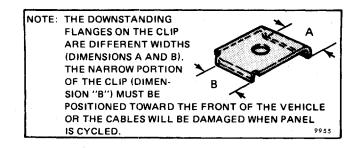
Proper Installation of Drive Cable Retaining Clip - E and K Styles
